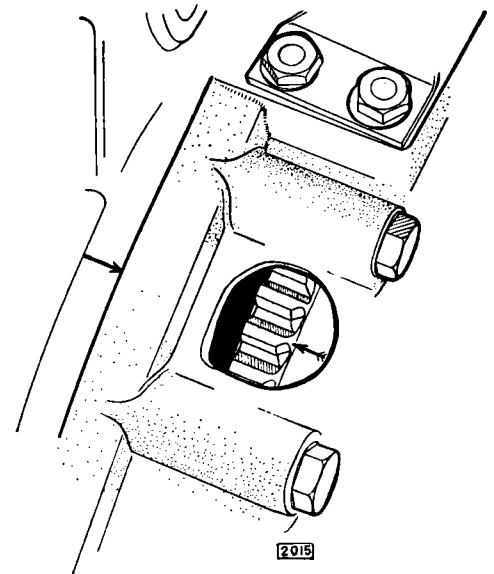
Showing the location of the Top Dead Centre marks on the left-hand side of the combined engine and transmission unit
